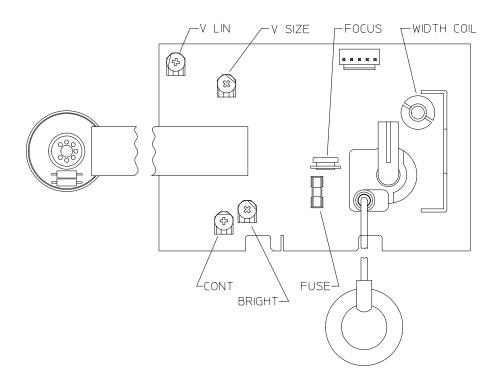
Z-Axis CRT Driver Board Adjustments
